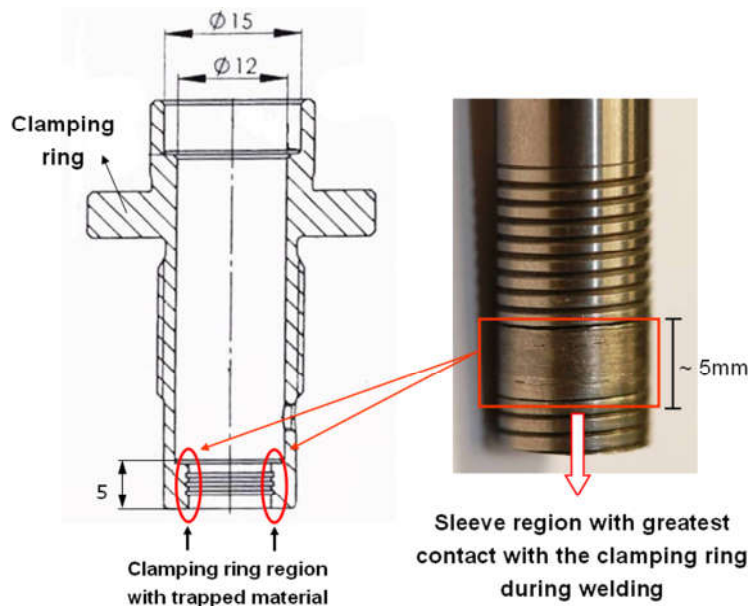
Schematic representation of clamping ring indicating the region in frictional contact with sleeve matching the plastic deformed region of sleeve after 2000 performed welds.
